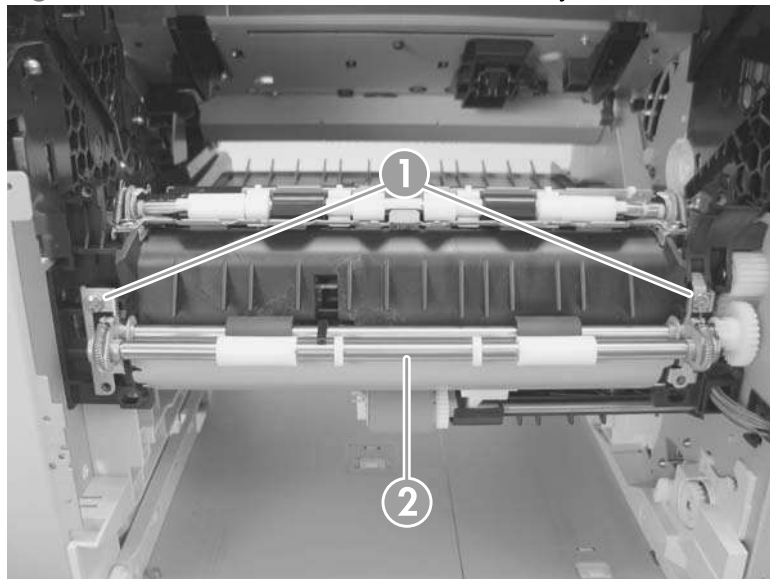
Remove the Tray 1 pickup assembly (3 of 3)
